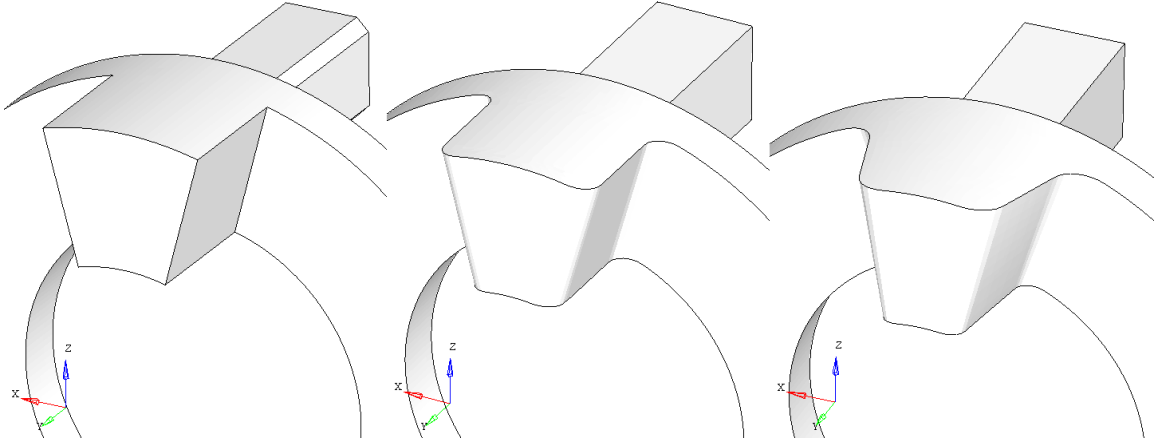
Illustration of three different pad shapes studied: straight pad, straight pad with fillets, and an angled pad with fillets.
